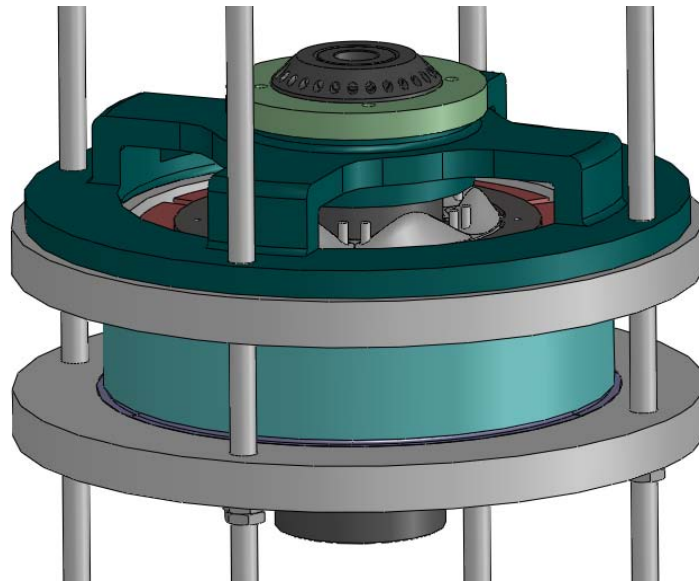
Top sandwich (or stator plate) along with the catcher bearing placed on the radial magnetic bearing
